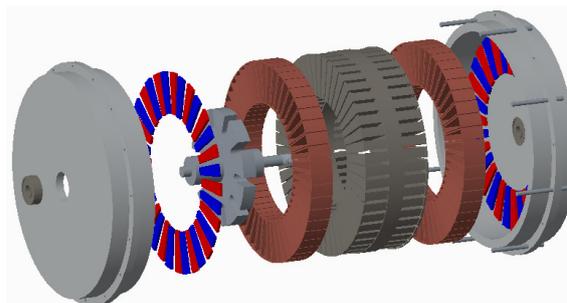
Model of disc BLDC motor with dual external rotor and central grooved stator
